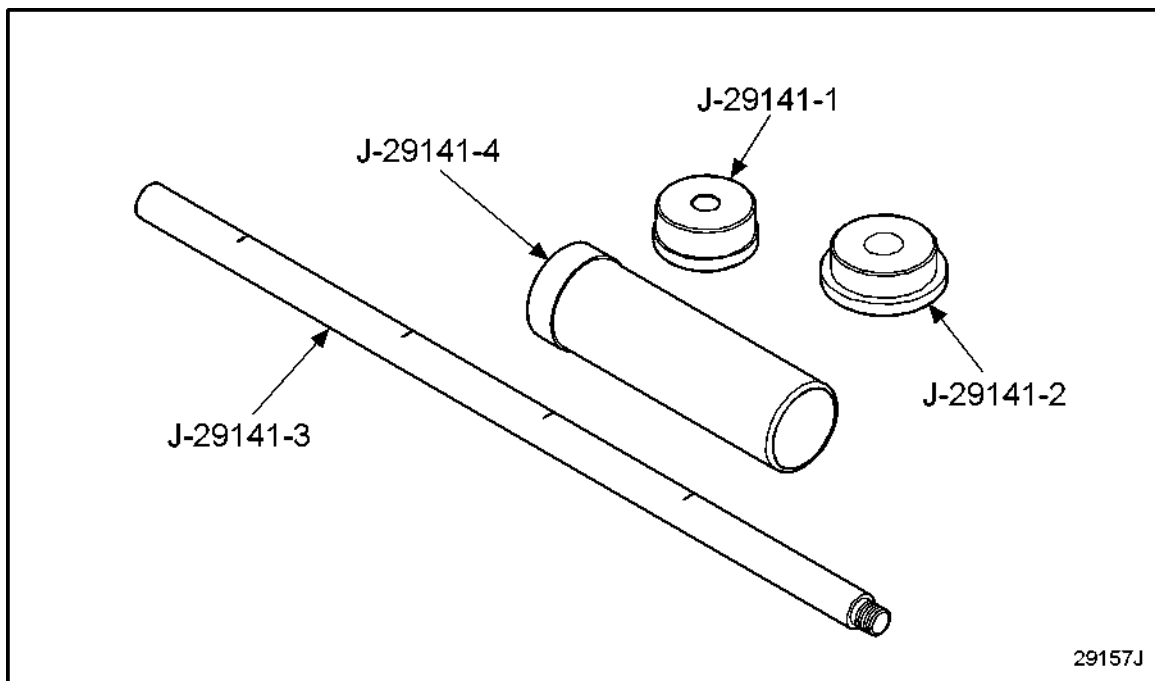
Cam Bushing Remover & Installer, J 29141-A
